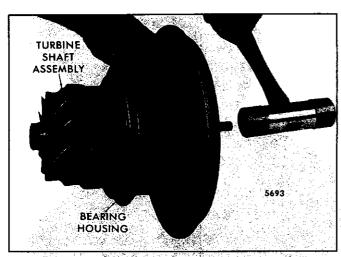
Tapping Turbine Shaft Assembly from Bearing Housing
